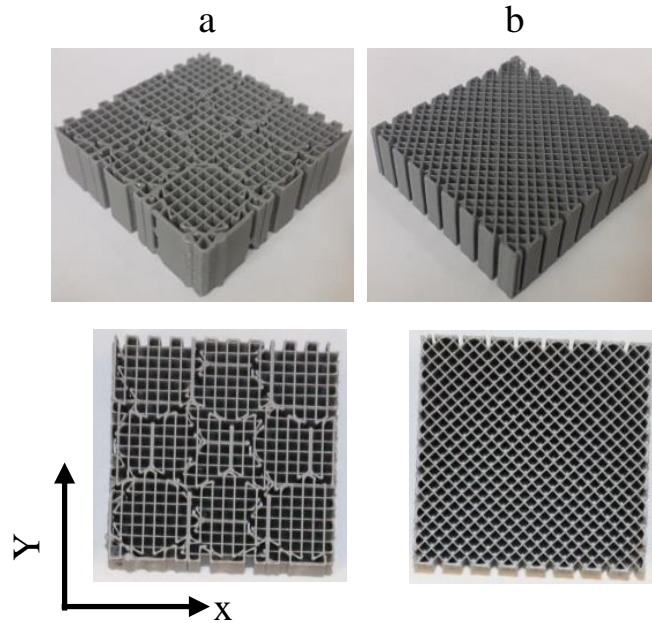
Printed Specimen; a) proposed pattern; b) Zigzag pattern.
